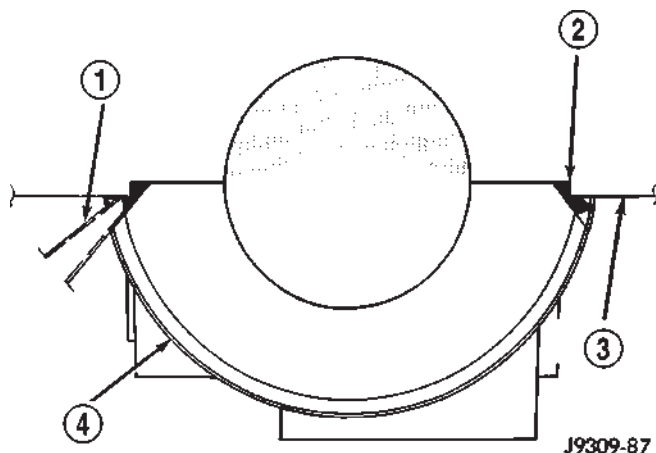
Apply Sealant to Bearing Cap to Block Joint
